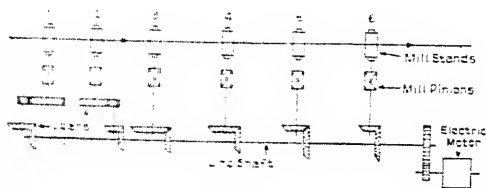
ELEMENTARY DIAGRAM OF A CONTINUOUS MILL WITH A SINGLE DRIVE
